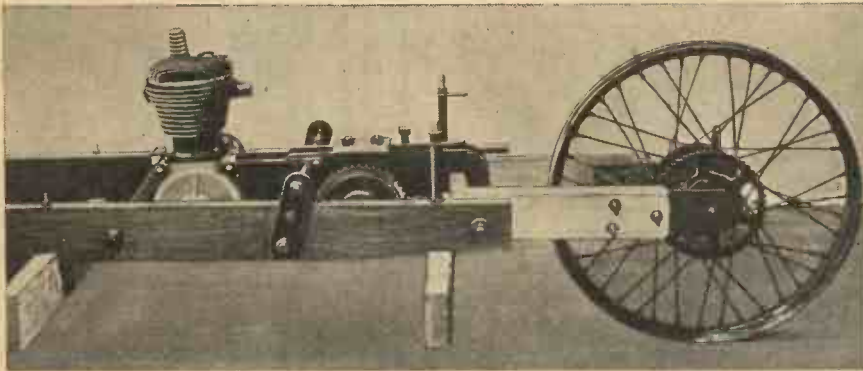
Engine and gearbox, and rear forks assembled on chassis.
